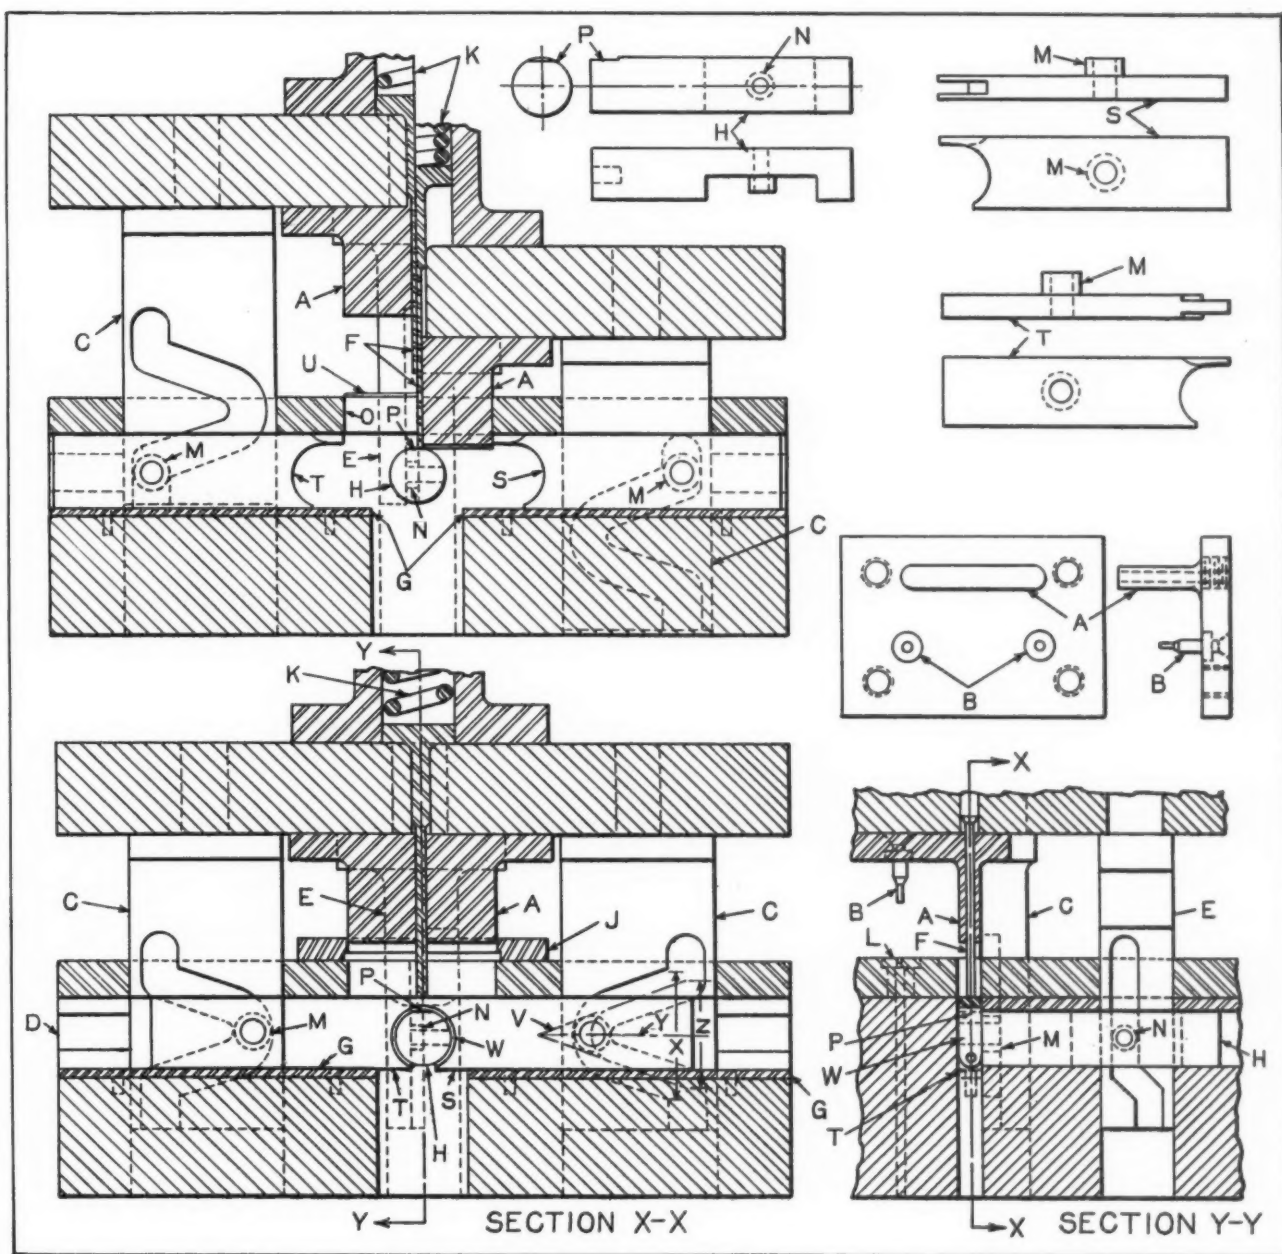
Cross-section Views Illustrating Operation of Die Shown in Fig. 1, and Separate Views of Slides, Guides, and Punches
